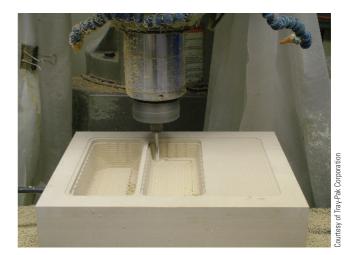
CNC machining of this prototype mold is typical of the type of work performed by mold makers.
